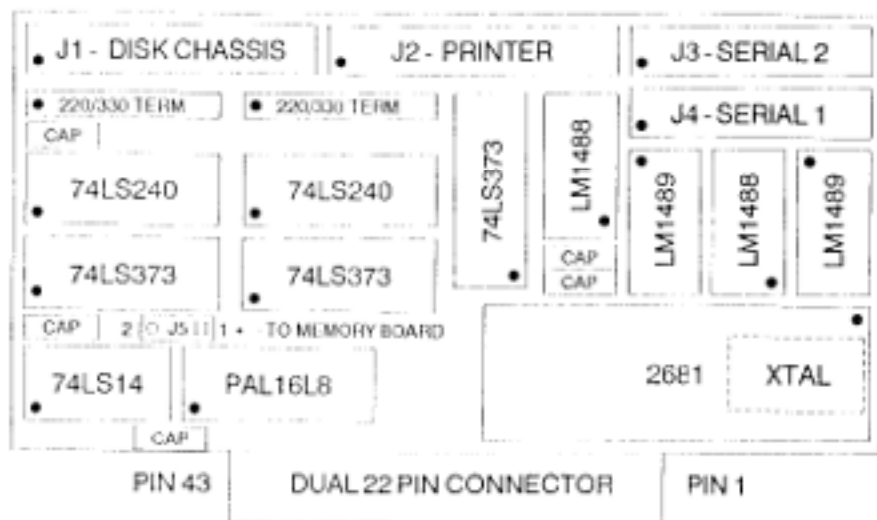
INTERFACE BOARD LAYOUT (COMPONENT SIDE)
